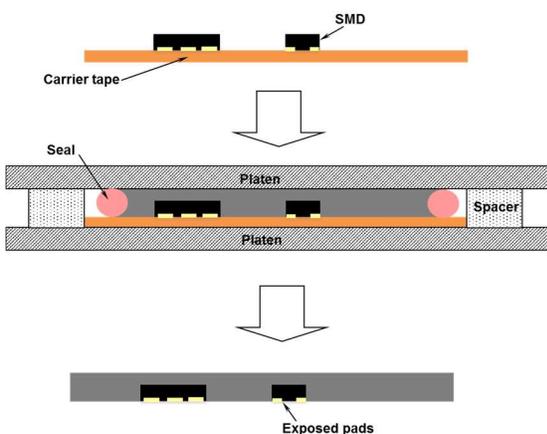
Encapsulation process for SMD leadless components. Top: placement on tape carrier; Center: epoxy casting, and Bottom: removal of carrier tape.
